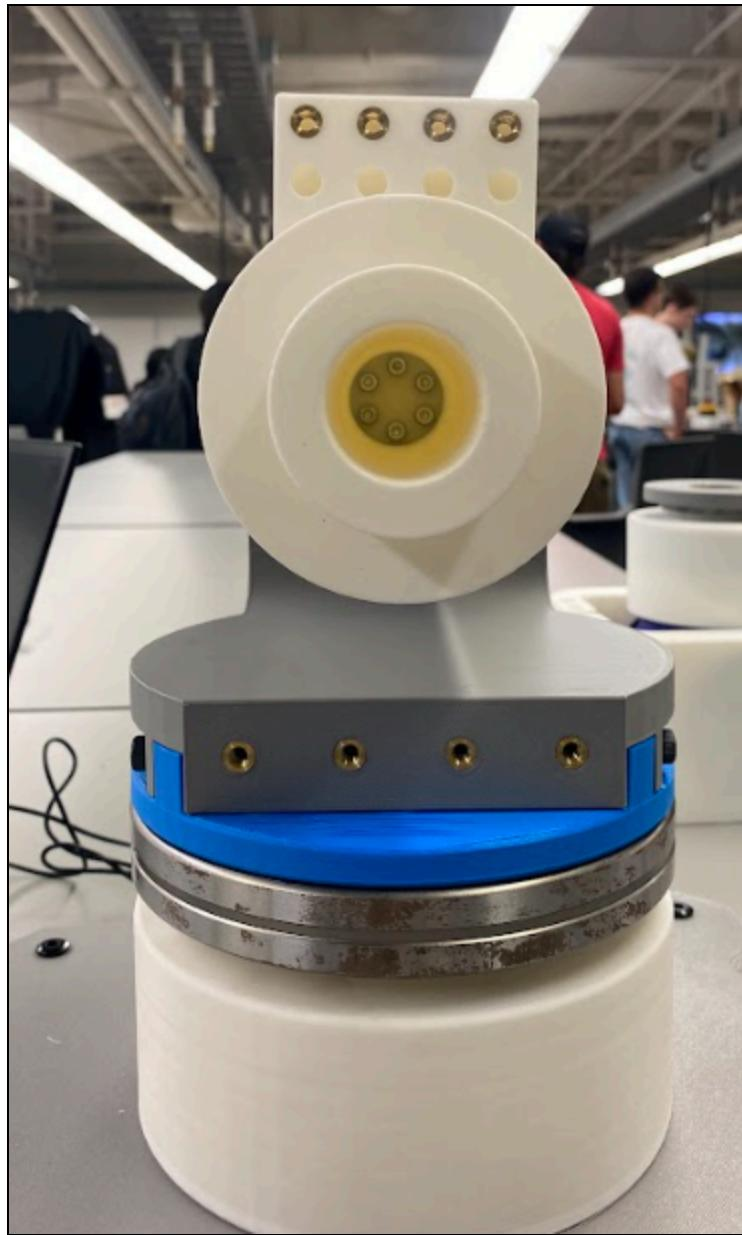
Fully assembled J2 up until J2 Bearing Holder
